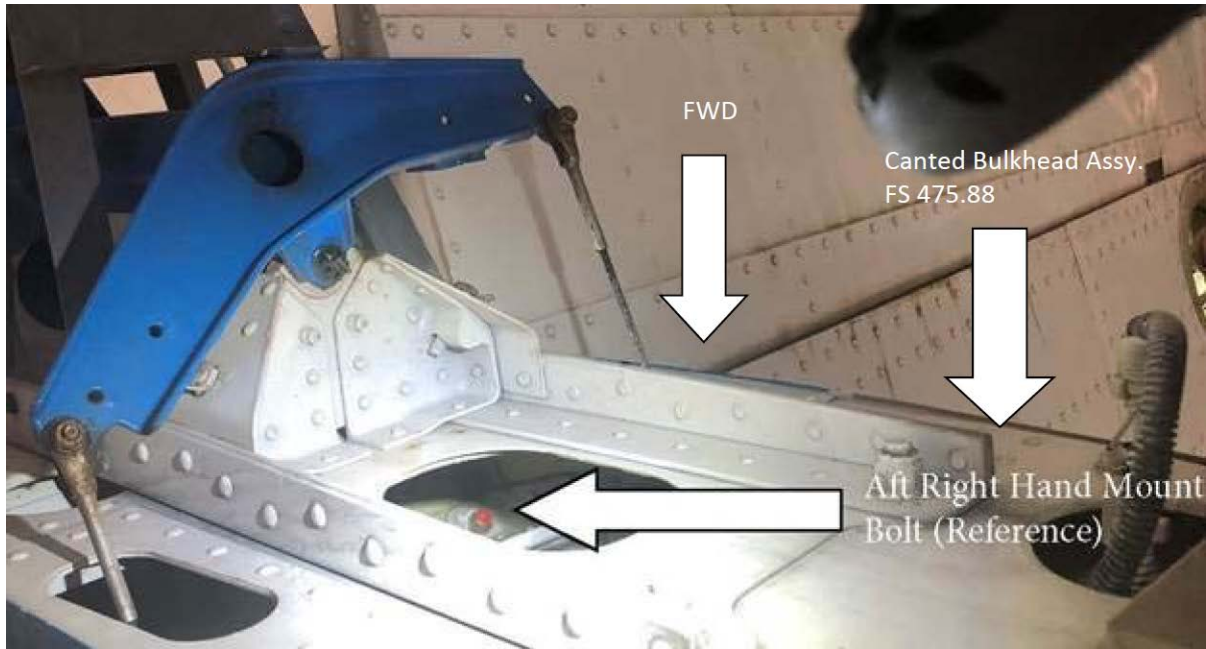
Left side Aft Horizontal Mounts Bolts (P/N AN4-12A)
